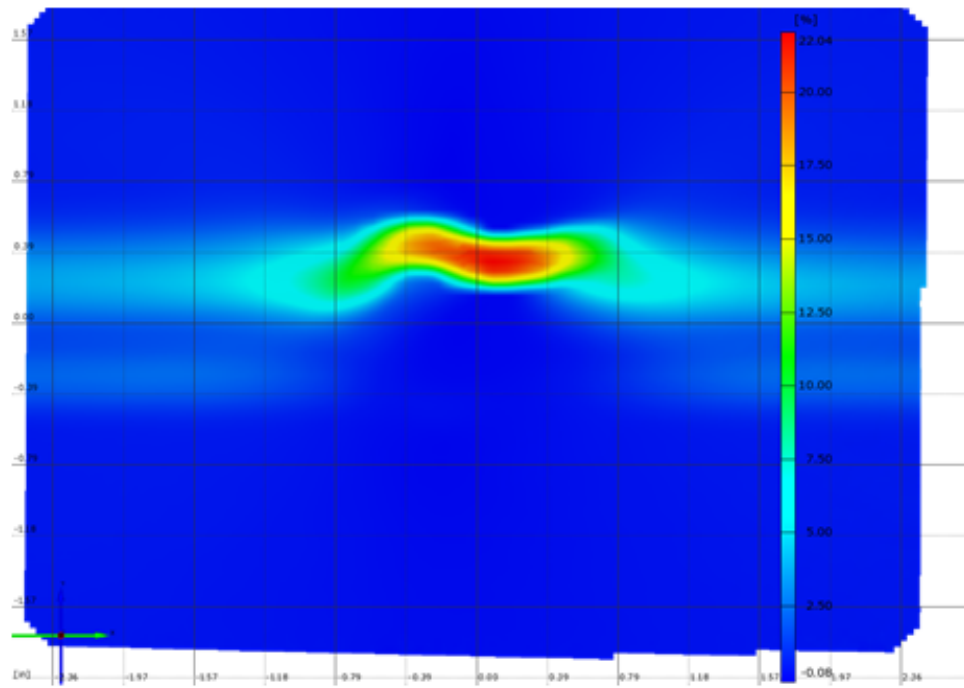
Strain pattern in sample CX05-P1 showing large strains at the crack (red region) with an accumulation of strain along the weld heat affected zone on the retreating side of the initial weld.
